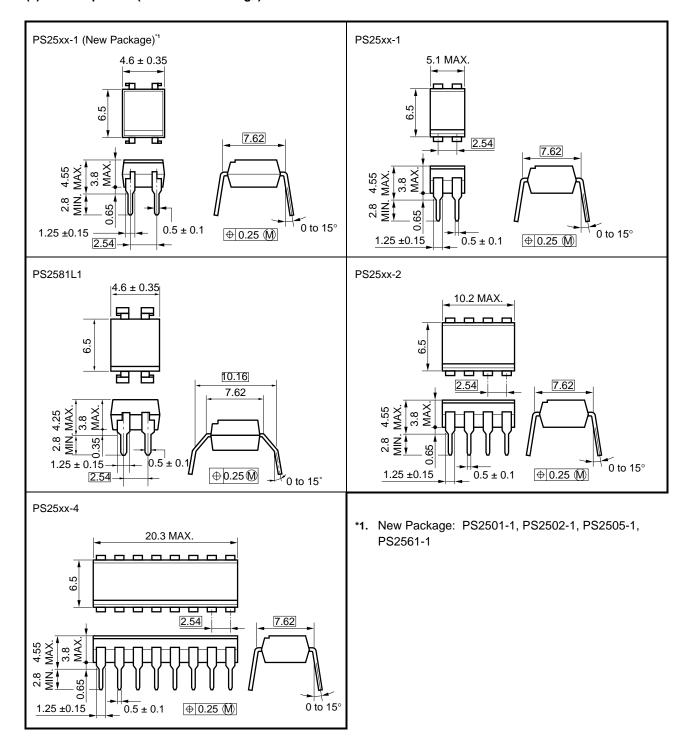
Package Dimensions of PS25xx Series (Unit: mm) (2/2)
